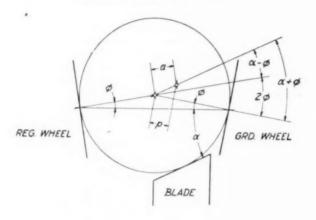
PENETRATION AT GRINDING WHEEL CAUSED BY LARGE ERROR AT REGULATING WHEEL
